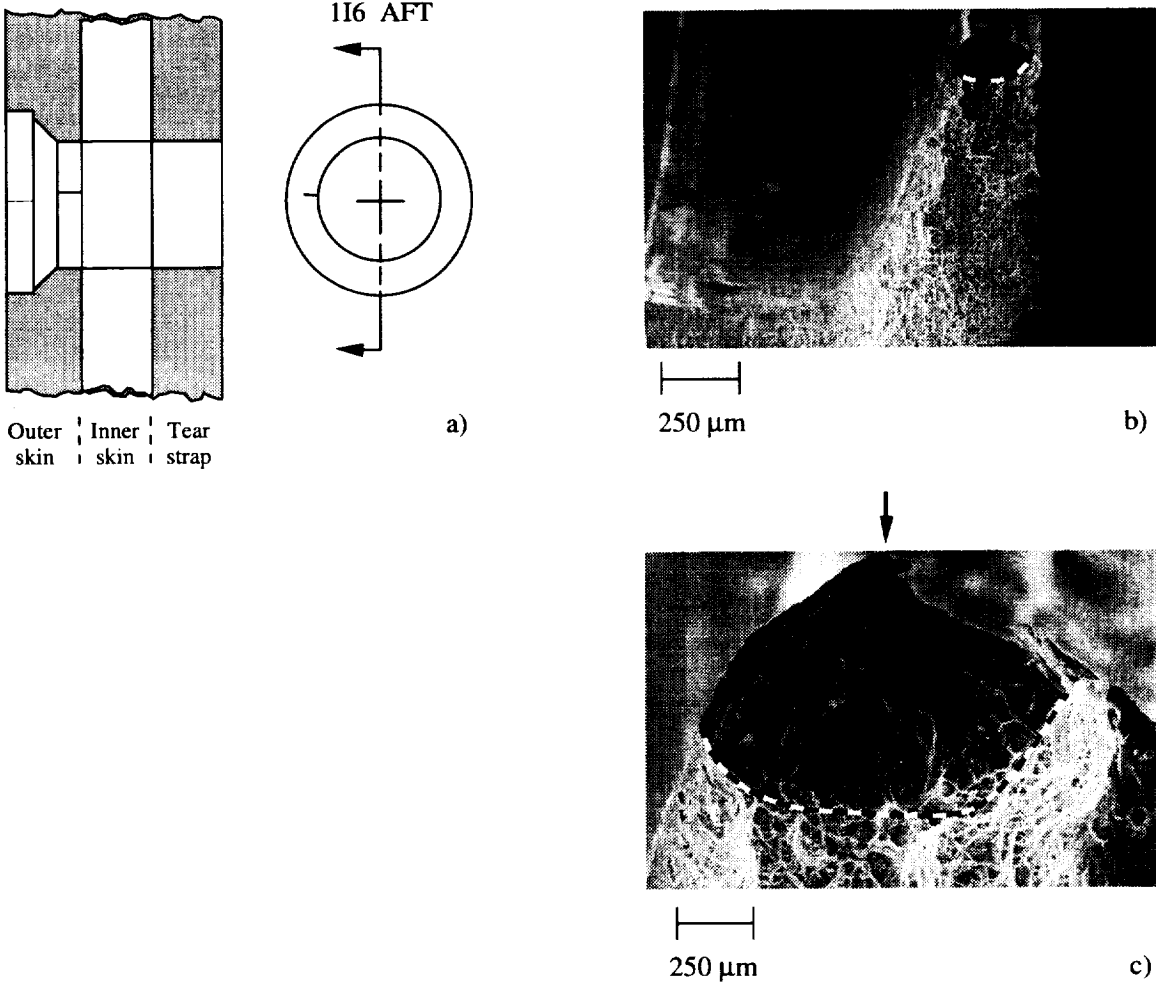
a) The schematic shows the rivet hole 1I6 configuration and the location of the outer skin fatigue crack oriented in the aft direction slightly above the 9 o'clock position. b) The SEM micrograph shows the fatigue crack location within the rivet hole. The dashed line marks the fatigue crack front. c) The SEM micrograph shows the fatigue crack region at higher magnification. The arrow marks the likely site of crack initiation. The dashed line marks the fatigue crack front.
